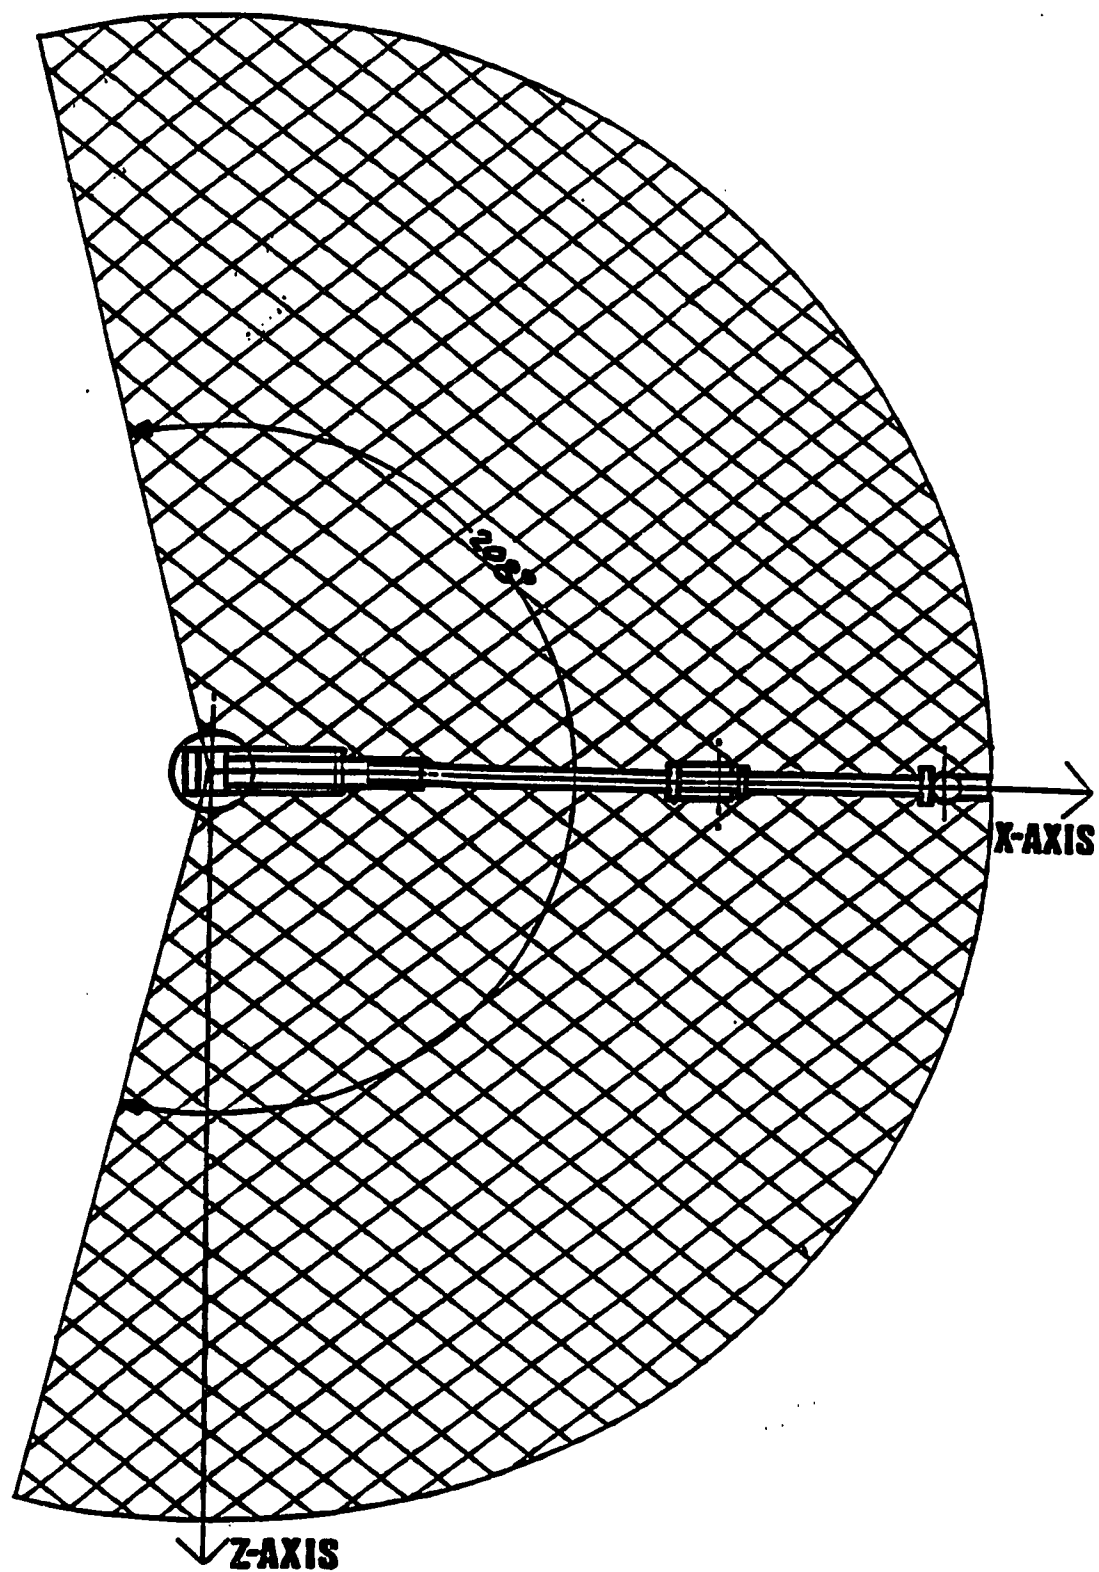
PLAN VIEW SHOWING WORKSPACE ENVELOPE IN XZ PLANE
